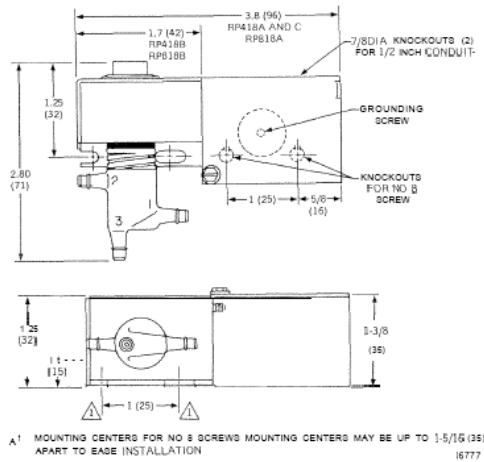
RP418, RP818 Dimensions in Inches (Millimeters).
